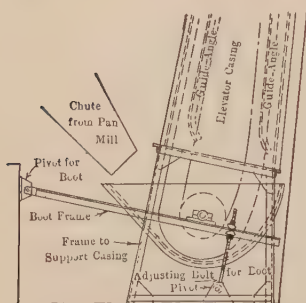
Take-up Adjustment by Moving the Whole Boot.
